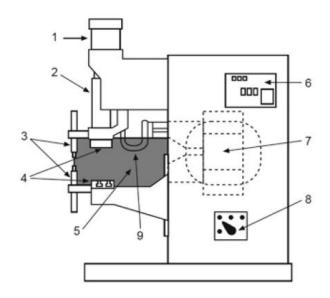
Ordinary spot / projection welding machine. (*Ruukki*, 2009)
